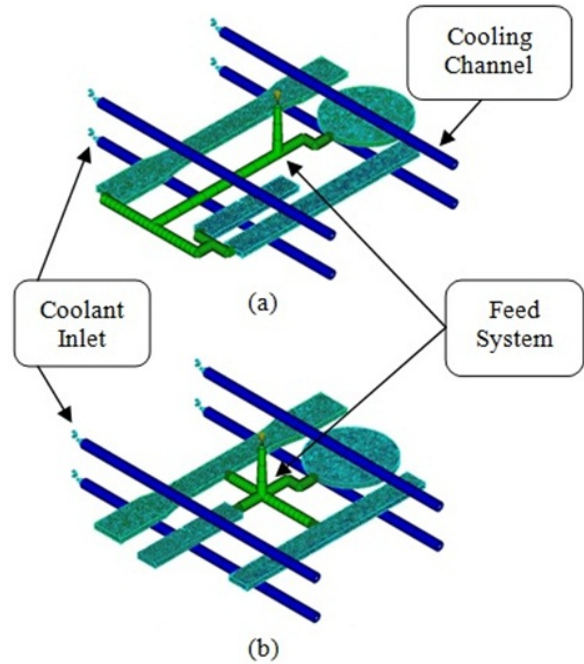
Family mold design by using (a) runner linear layout and (b) runner star layout.
